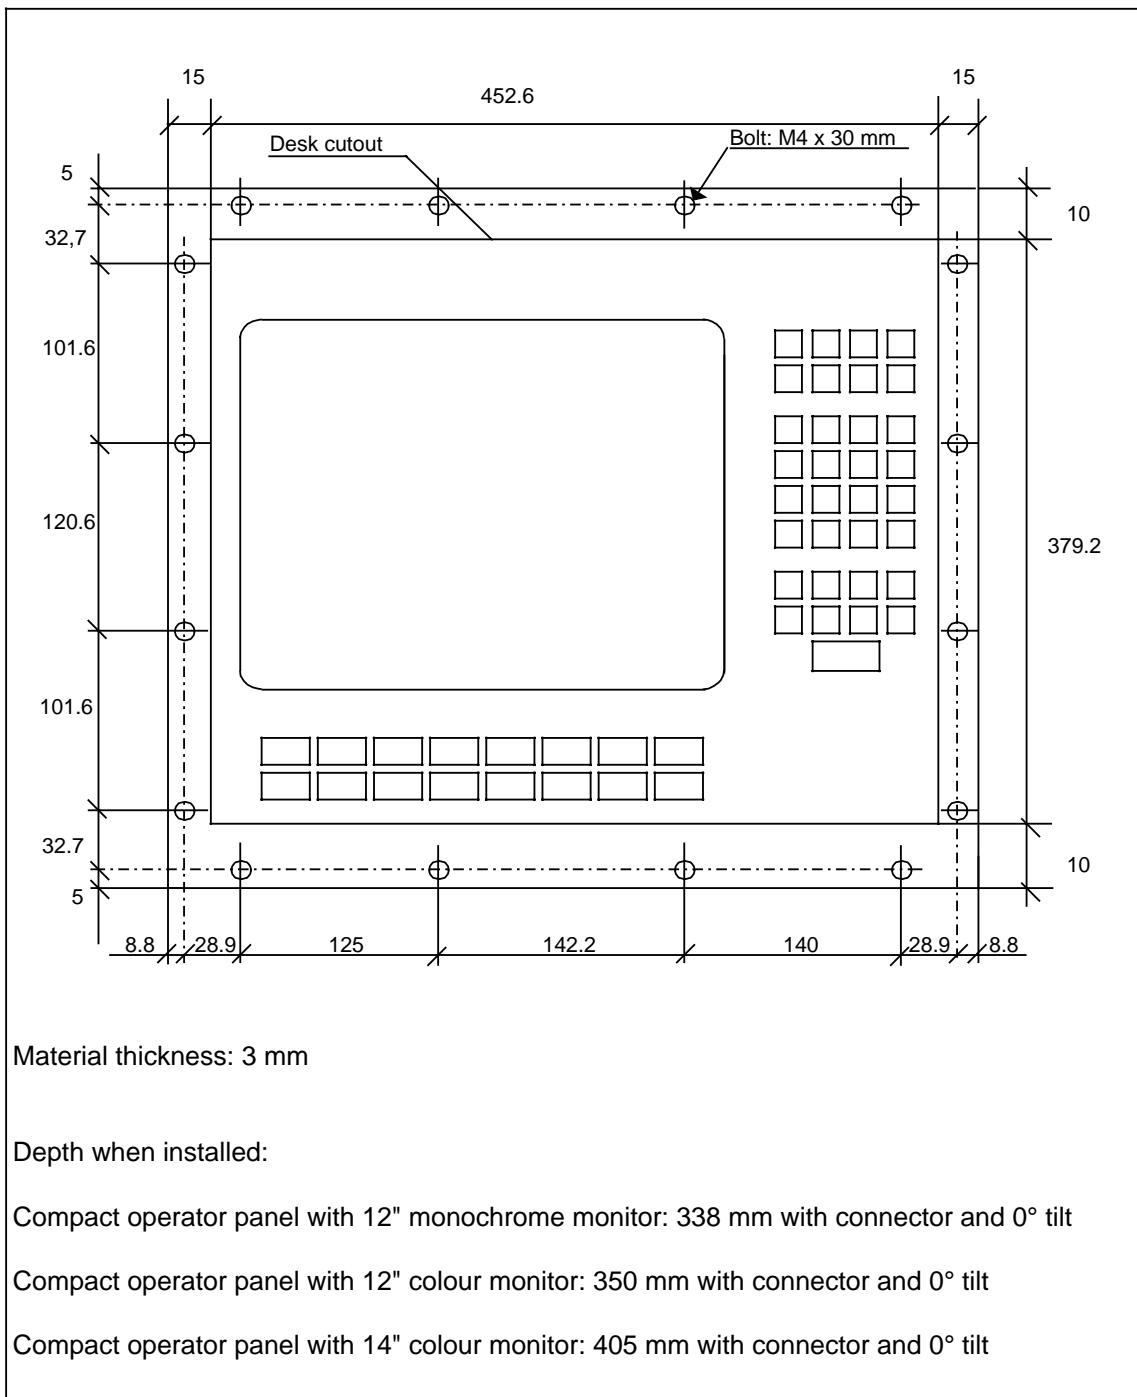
Mounting dimensions of 19" rack mounted compact operator panel with monitor
